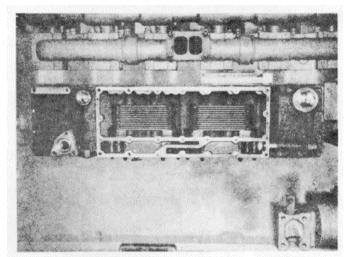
N-88. Install the Lubricating Oil Cooler Housing
